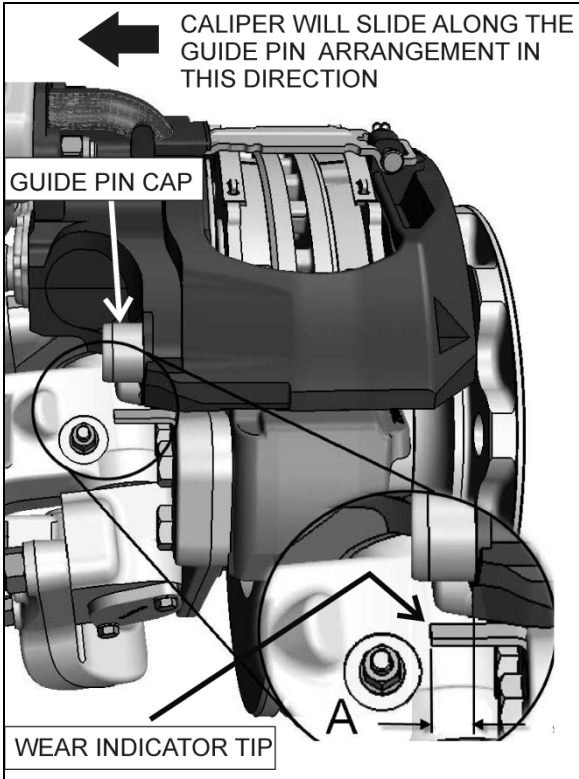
PAD WEAR CHECK FRONT AND TAG AXLE
